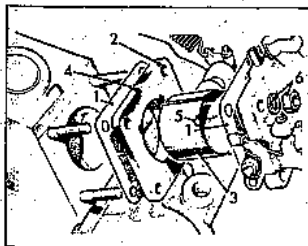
Gaskets, insulator and liner assembly (Sec 14)
